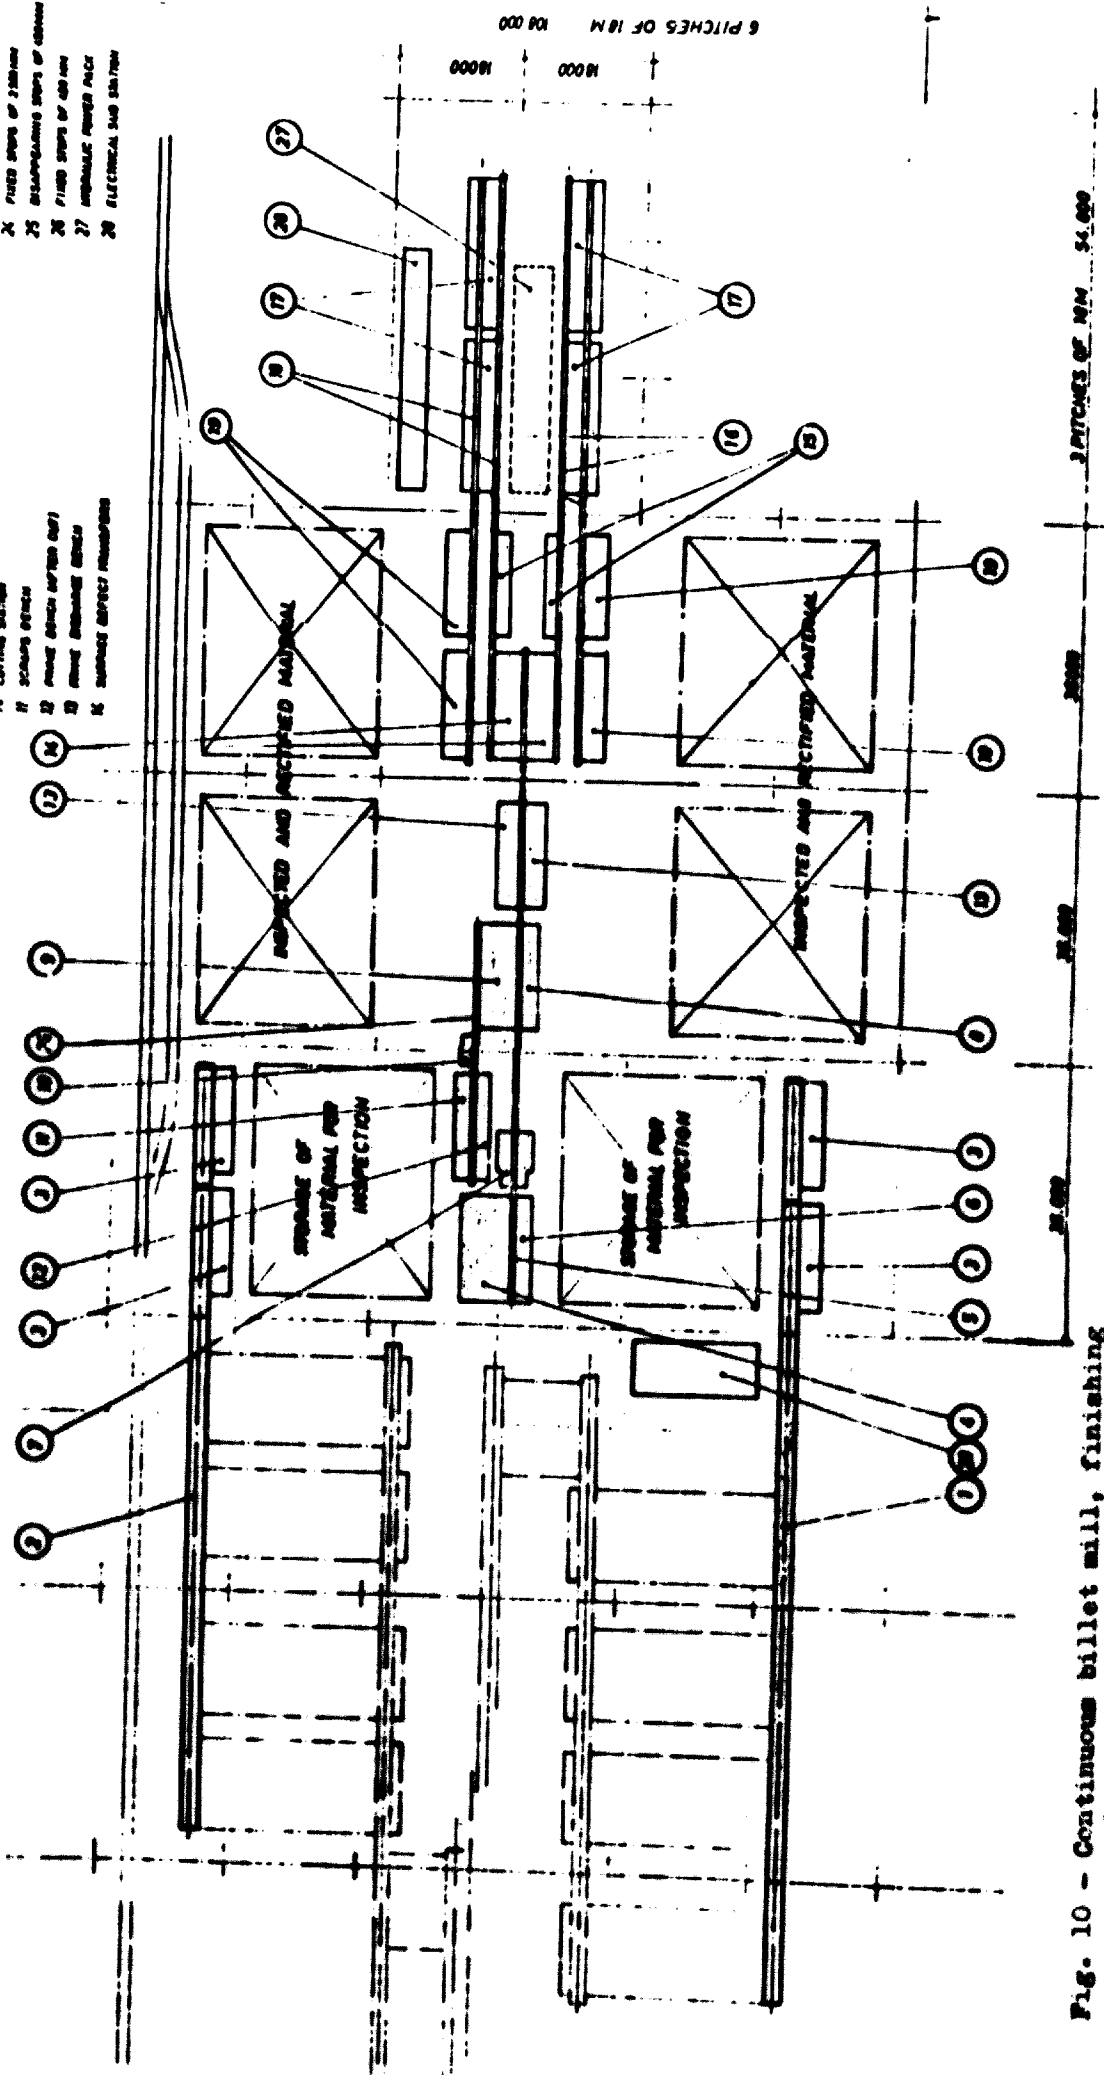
Continuous billet mill, finishing end, general arrangement
